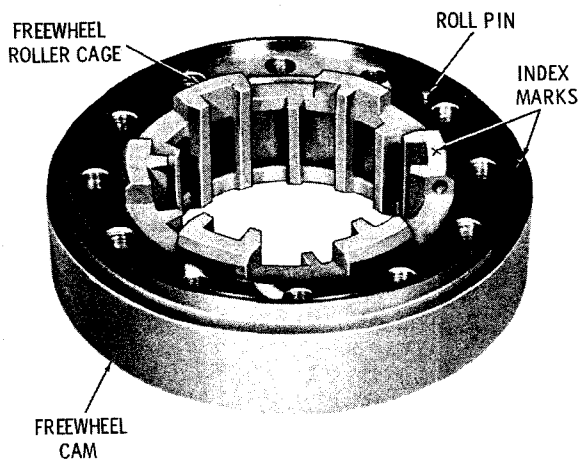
Freewheel roller cage installed in freewheel cam
